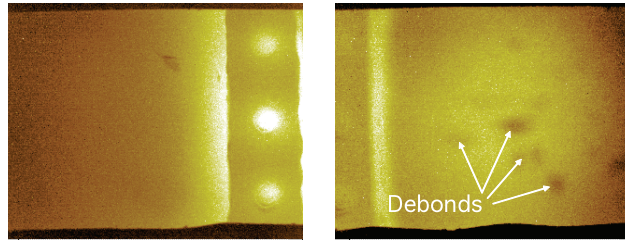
IR thermography image of an as-manufactured weld bonded specimen.
